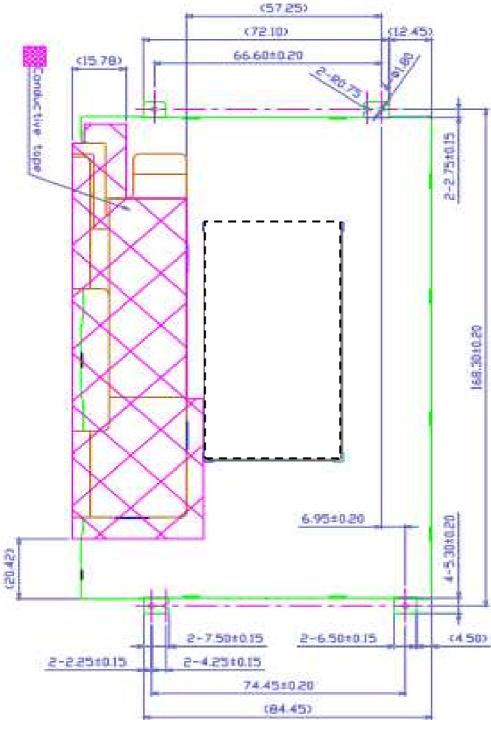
TFT-LCD Module Outline Dimensions (Rear view)
